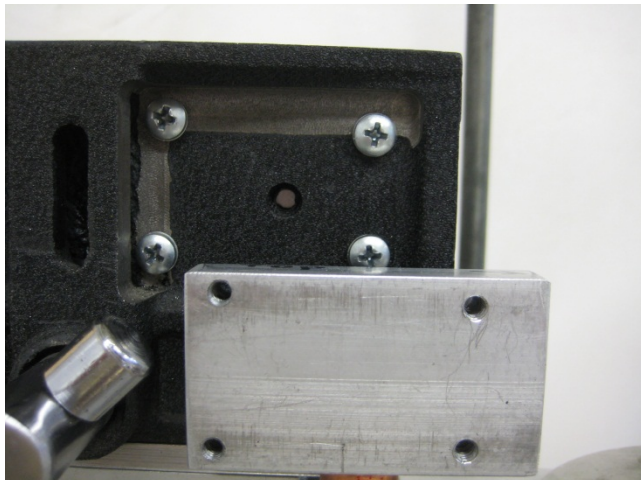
Matching bolt pattern on vise and vise jaw inserts
